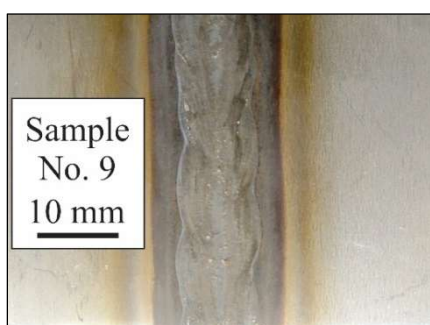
Specimen N° 9 - TAG, 210 A, filler wire 80 cm/min.
